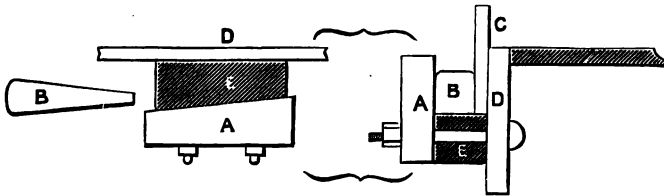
CONTRIVANCE FOR HOLDING BOARDS ON EDGE.
